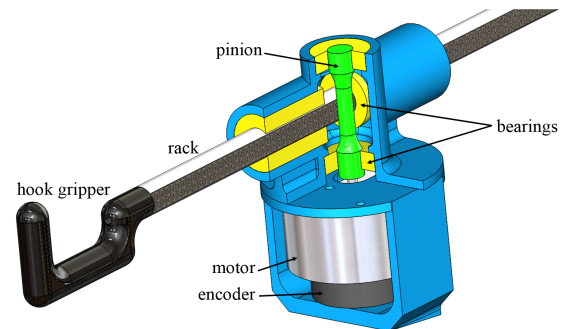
Cross section CAD drawing of the pinion-rack mechanism.
